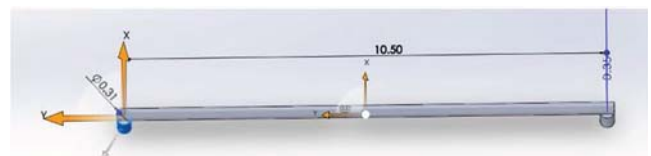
Wheel Movement Shaft with Dimensions (in inch)
